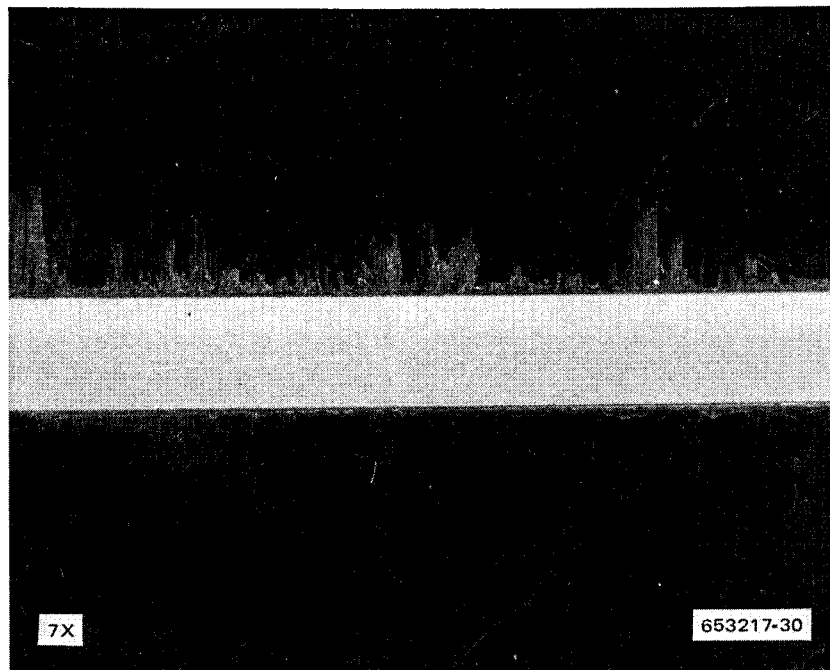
Transverse Tensile Specimens of G/E Showing Poor Edge Condition of Improperly Machined Specimen (upper) and Good Edge Condition of Properly Machined Specimen (lower)
